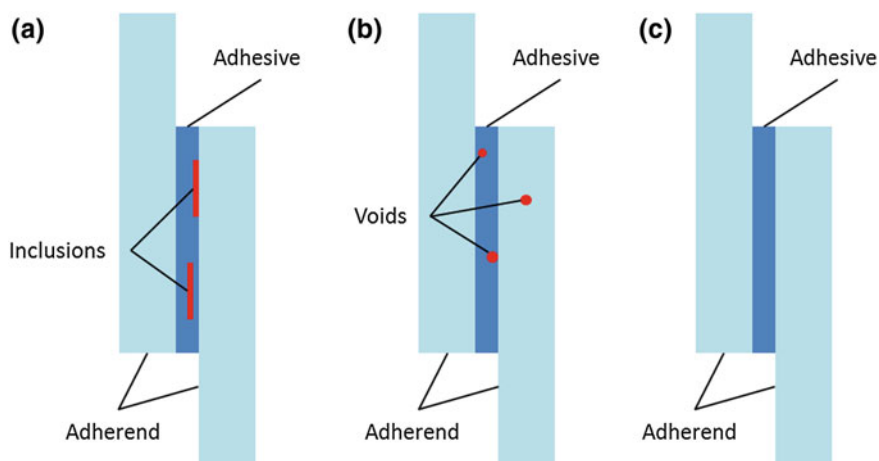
Three categories of defects typically found in adhesive joints; a inclusions, b voids and c kissing defects
